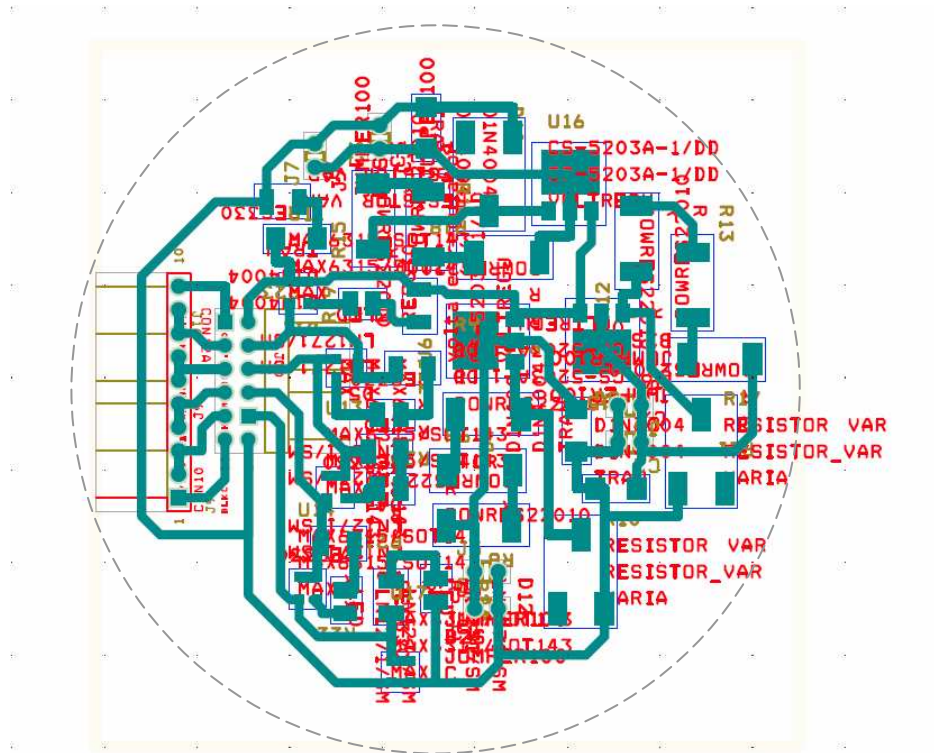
Printed circuit board footprints for the spherical dipole radiator
